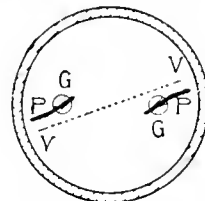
Cross-sectional View Through the Middle of the Gauge Shown in Fig. 44
